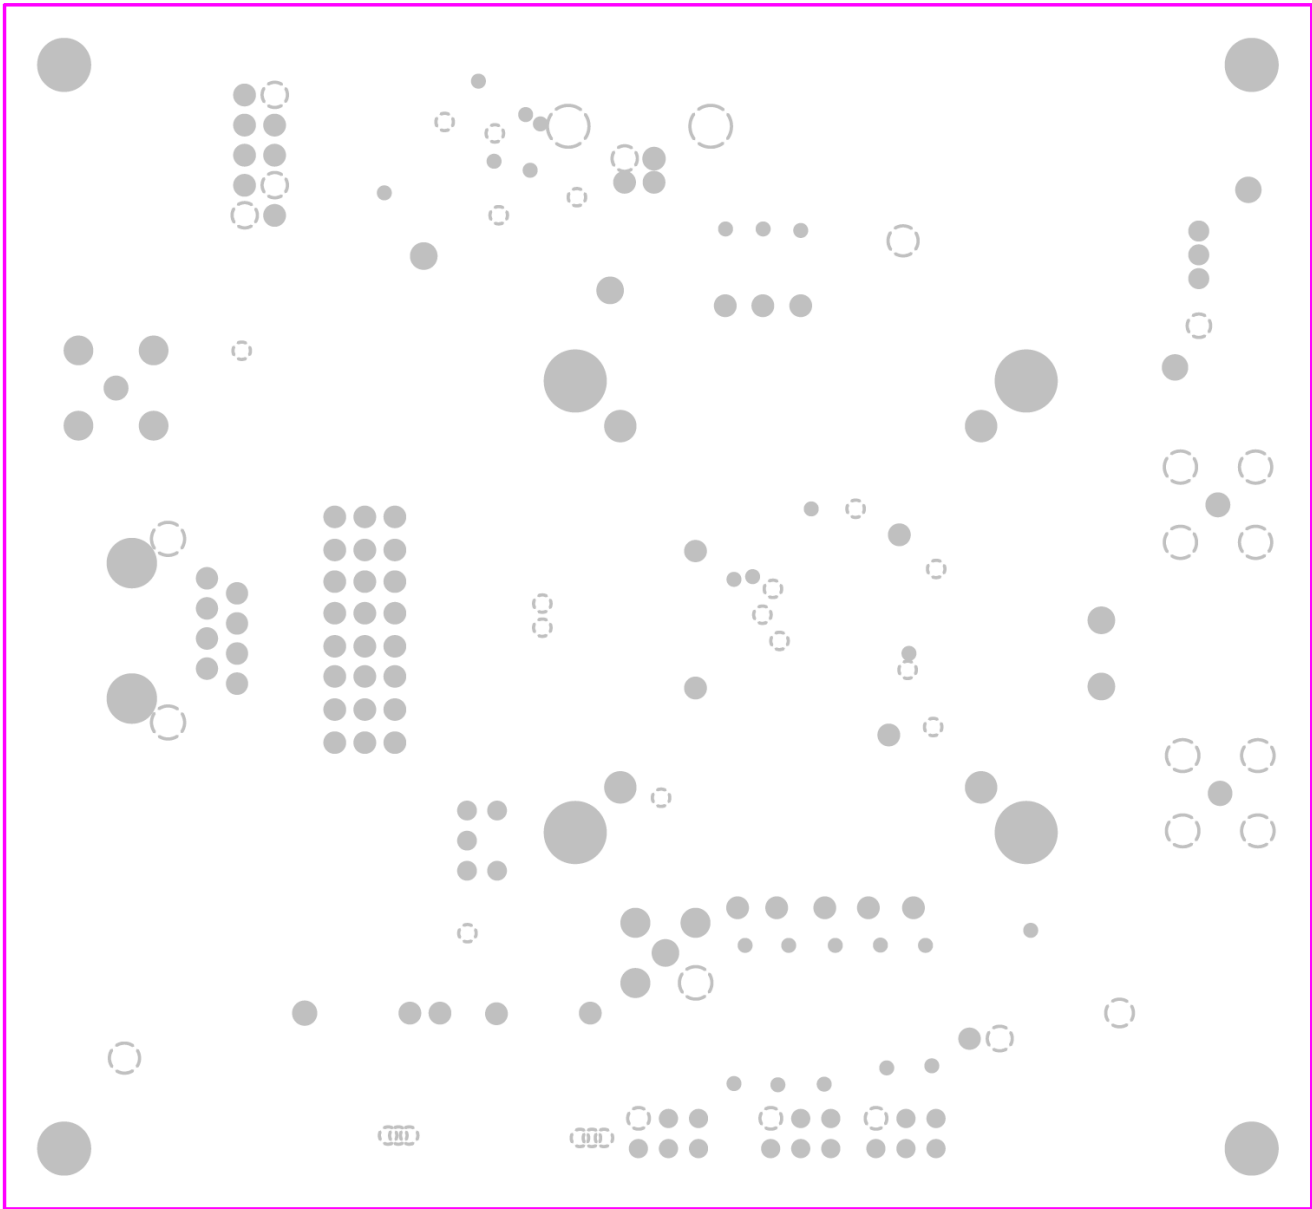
PCB INTERNAL PLANE 1 (GROUND)
